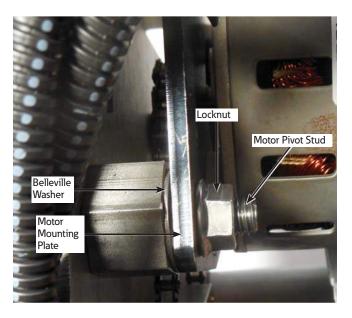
Motor mounting plate properly seated on the mounting stud shoulder. Notice that there is no gap between the motor mounting plate and Belleville washer.
